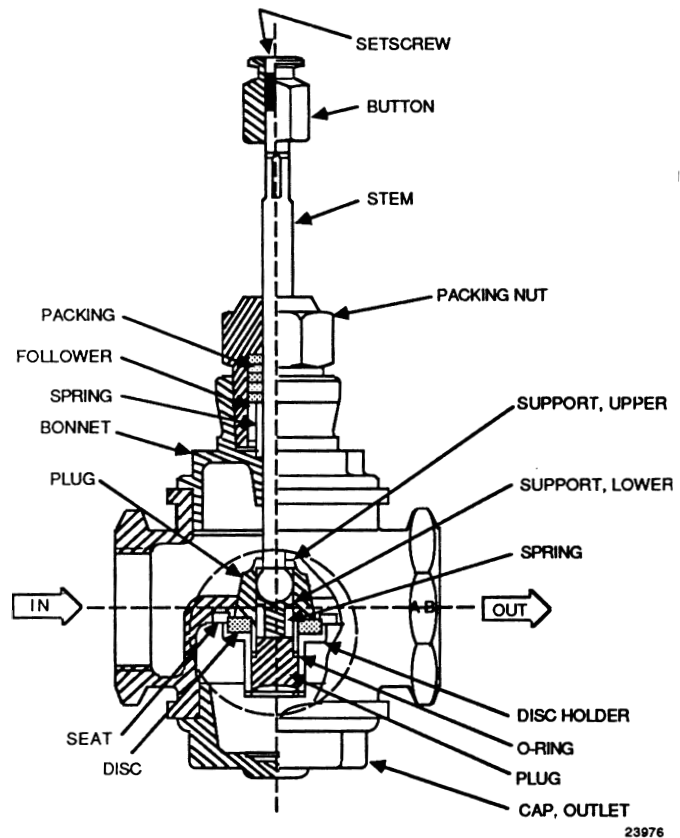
V5011H and J Reverse Acting Threaded Body Valve—Cutaway.
